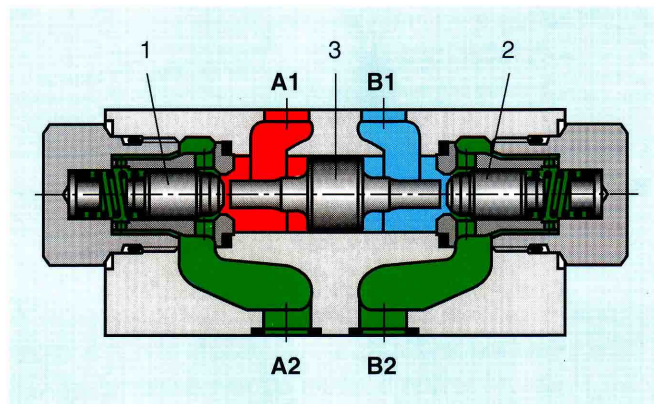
Double check valve for sandwich plate mounting, type Z2S
